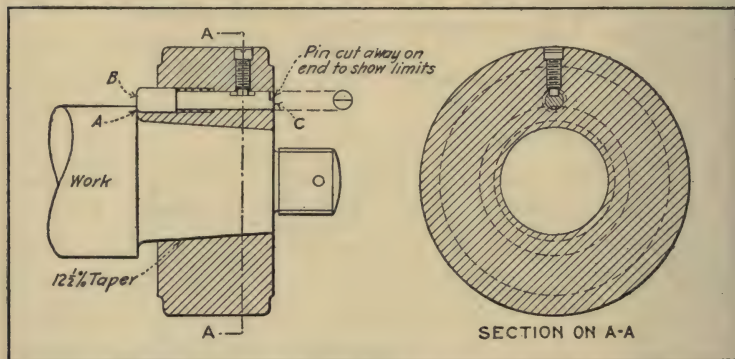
FLUSH-PIN GAUGE FOR TAPERED SHAFTS
